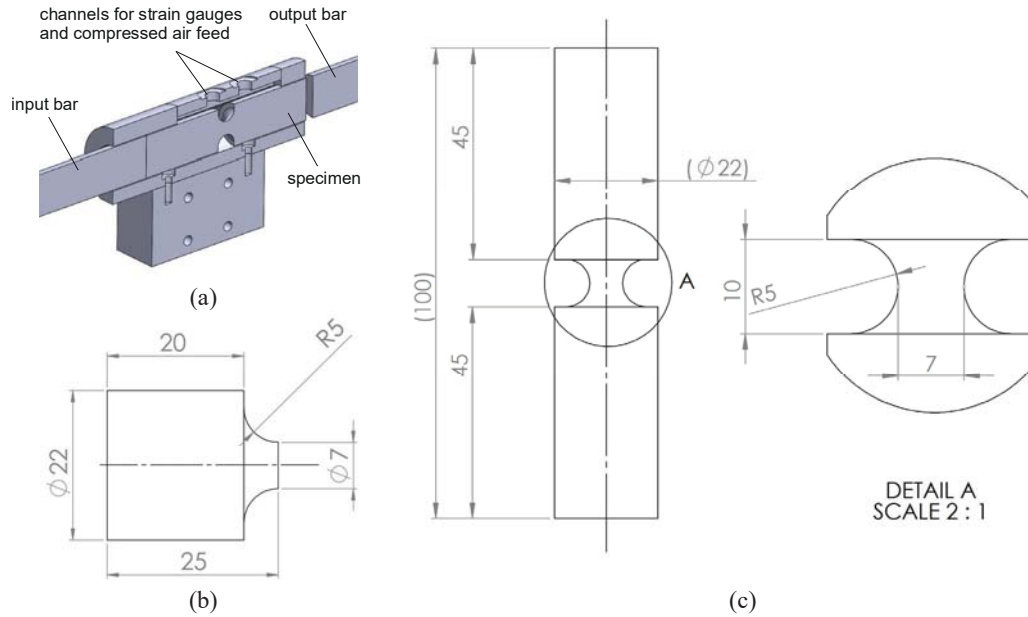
a) a CAD-model (cut section) of the specimen holder used in the experiments, b) drawing of the “contact surface fatigue” specimen composed of two symmetrical halves, and c) drawing of the “vibrating specimen” used for studying the cyclic compression/tension loading introduced by impact loading.
